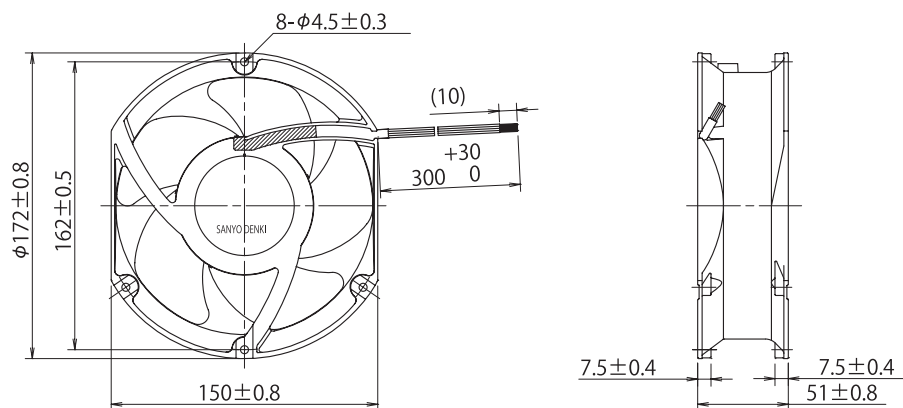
“San Ace 172W” WG type dimensions (unit: mm)
